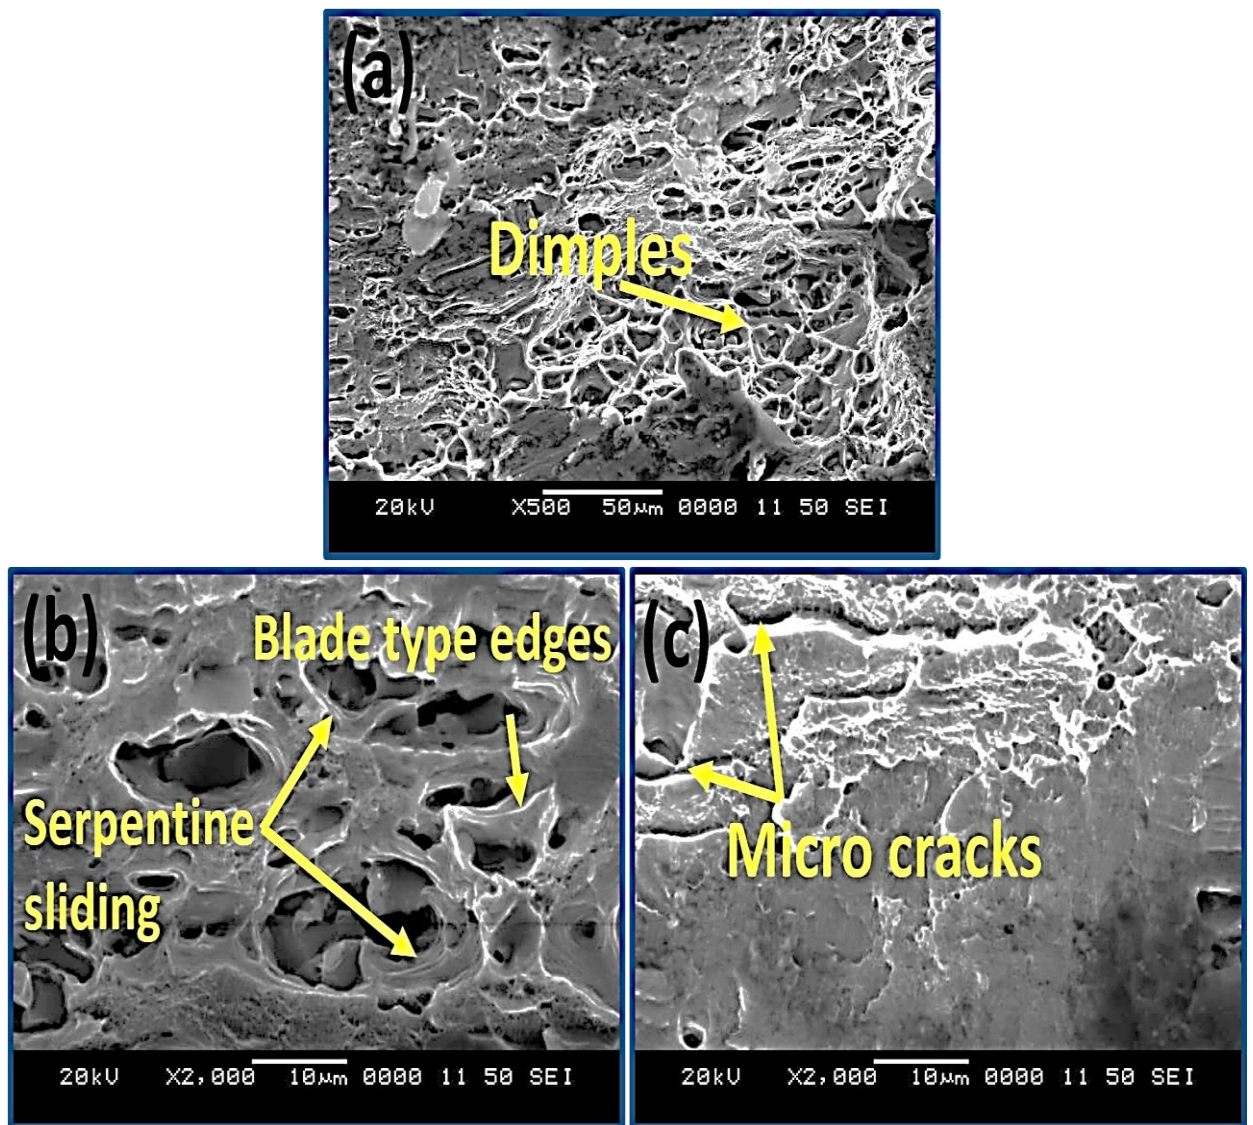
SEM images of fracture surfaces of the A6082- T6 weld interface in CMT welded A6061-T6 and A6082-T6 joint using ER4043 filler wire: (a) low magnification image shows tiny dimples; and (b) serpentine sliding and blade type edges and (c) microcracks at higher magnification
